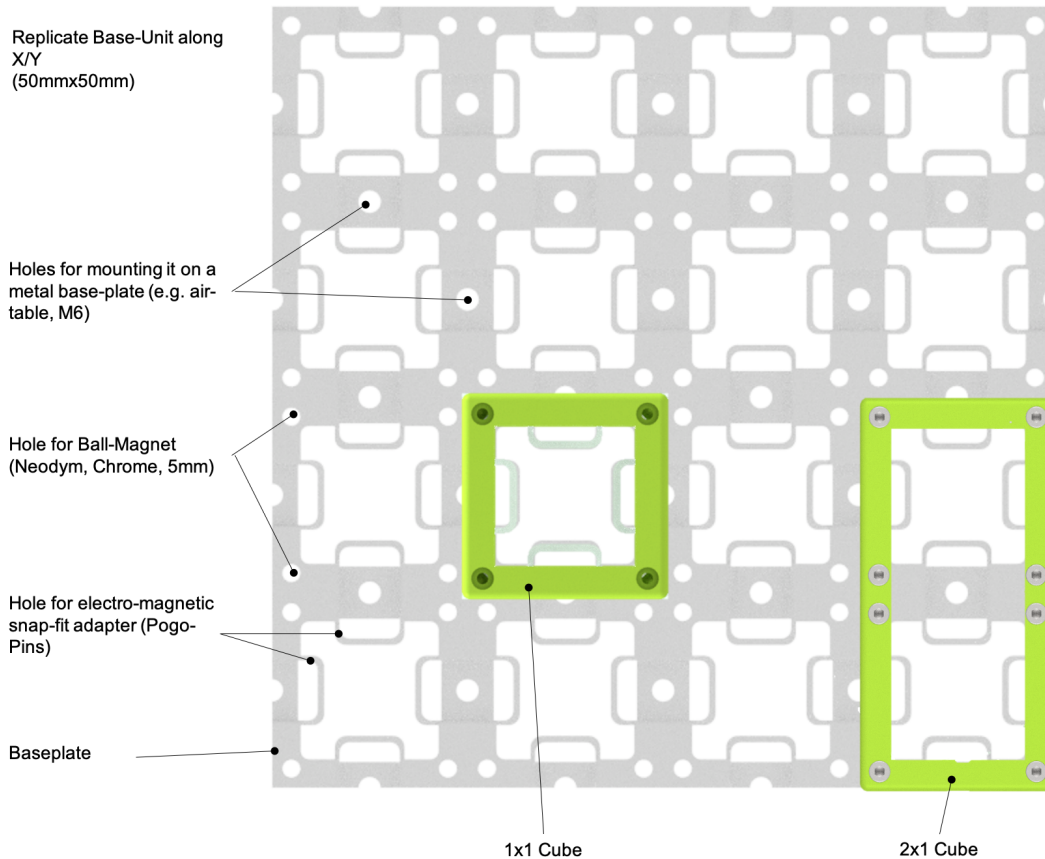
Baseplate 4×4 A exemplary assembly of a 4×4 baseplate equipped with two cubes. The M6 holes adapt to common optical tables to ensure long-lasting setups.
